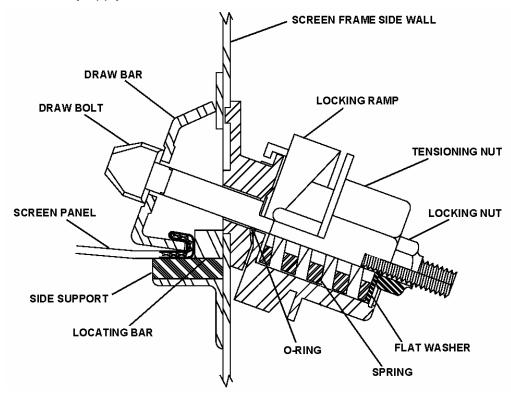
Ramp-Lok® Draw Bolt Assembly Components
